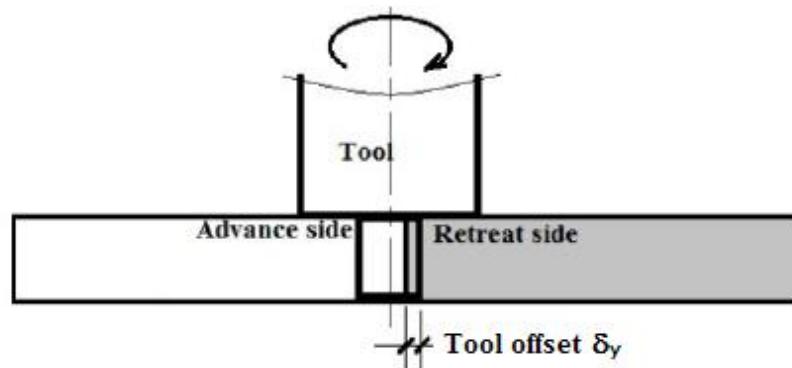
Tool (pin) lateral offset δ_y of FSW tool
